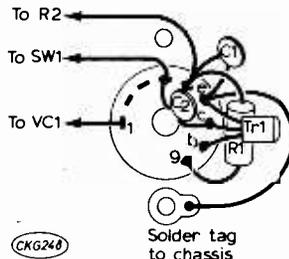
The wiring of the r.f. section on the B9A valve base into which the coil is plugged.
